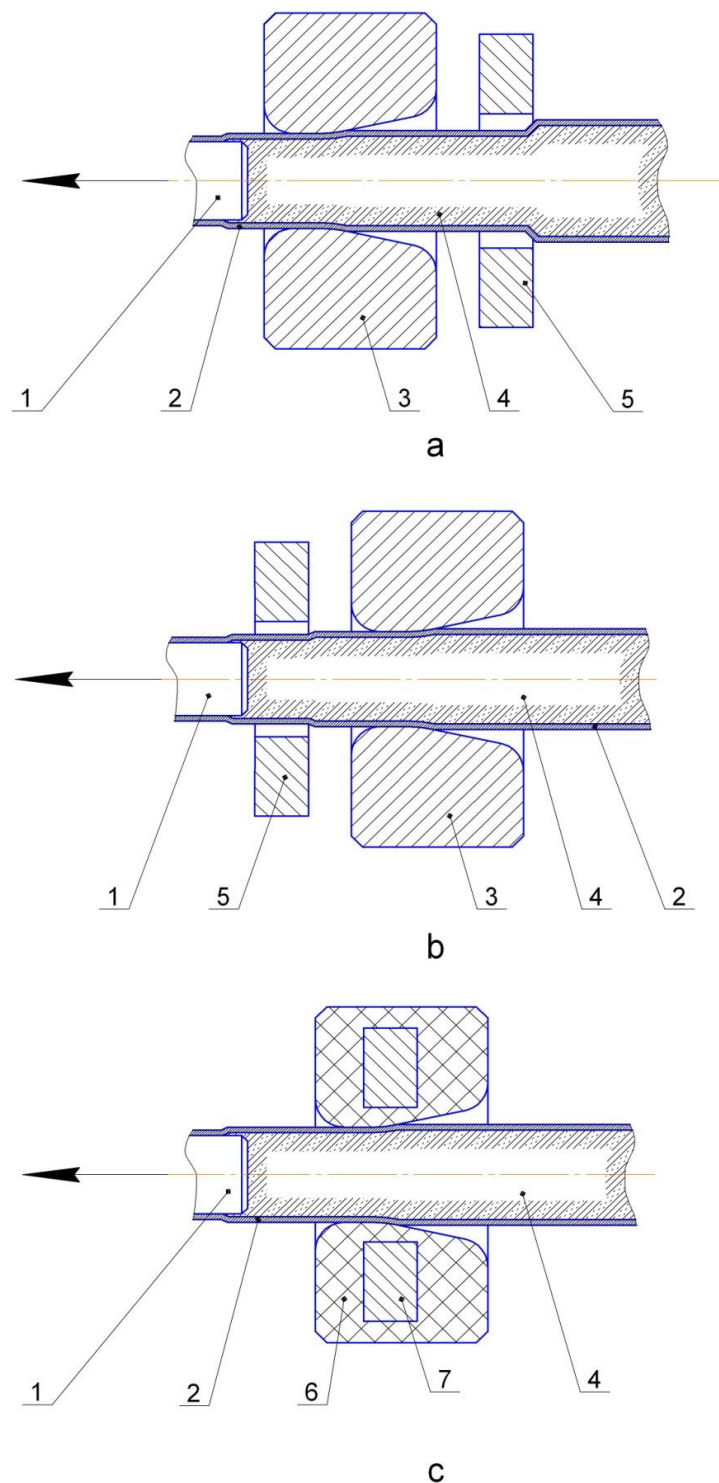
Hybrid schemes of powder pressing, combining static and pulsed magnetic loading: (a) magnetic pulse crimping performed before drawing; (b) magnetic pulse crimping performed after drawing; (c) magnetic pulse crimping and drawing performed simultaneously.
